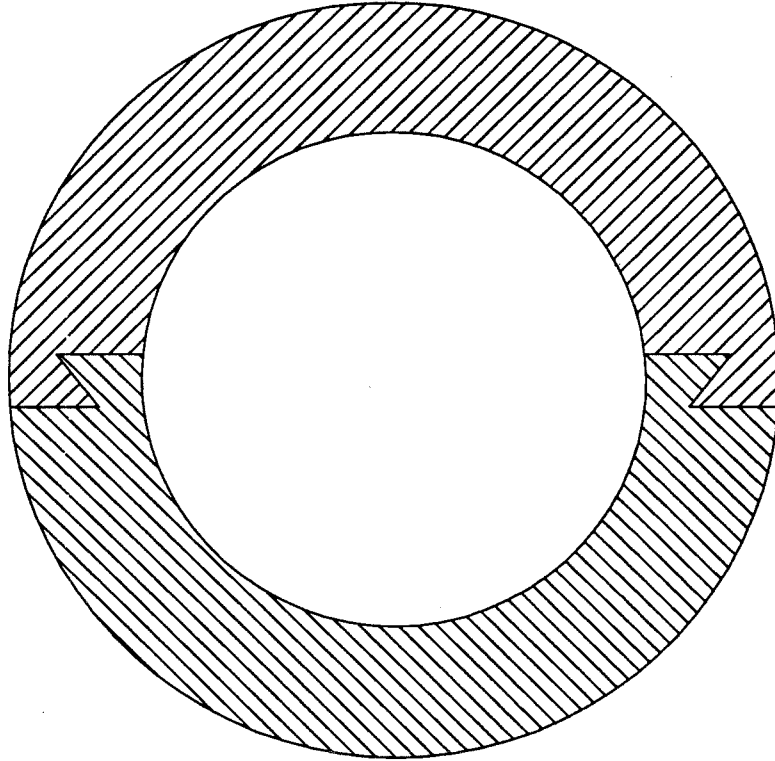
Sketch of the model cross-section showing the assembly of the two longitudinal cone parts.
